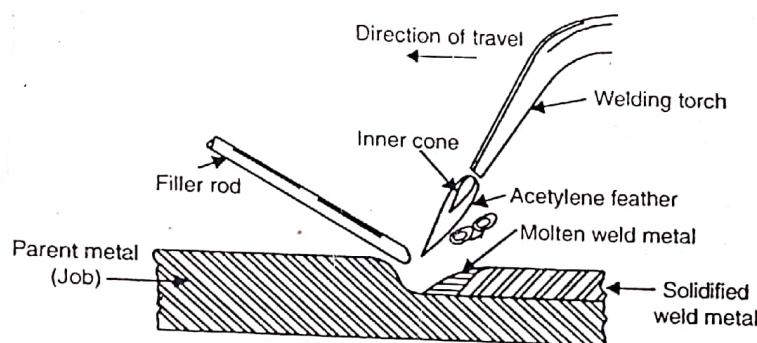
Oxy-Acetylene Welding.
